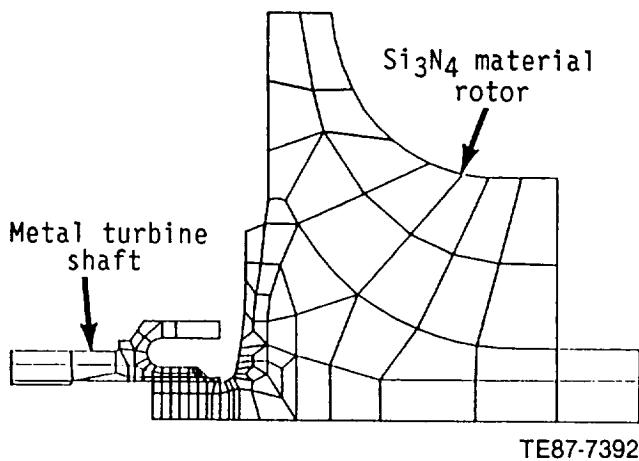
Power turbine assembly, rotor/shaft assembly, 2-D finite element model, Si_3N_4 rotor.
